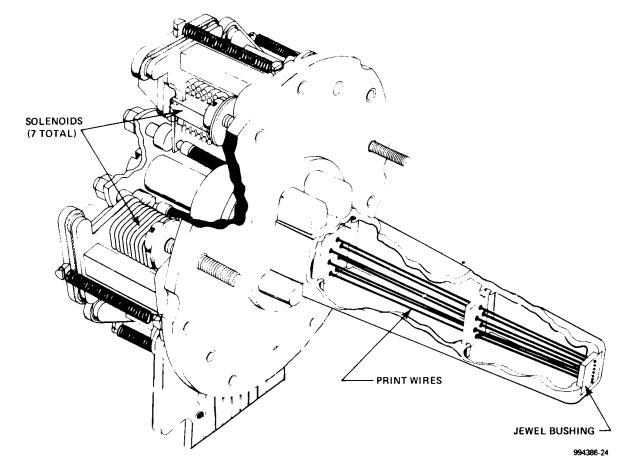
Typical Model 810 Printer Printhead Assembly
